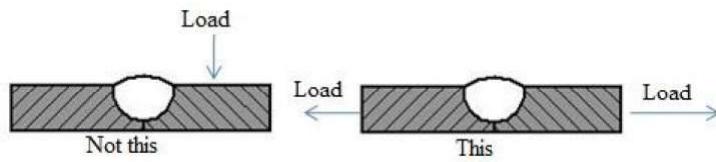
Groove welds either in tension or compression.
